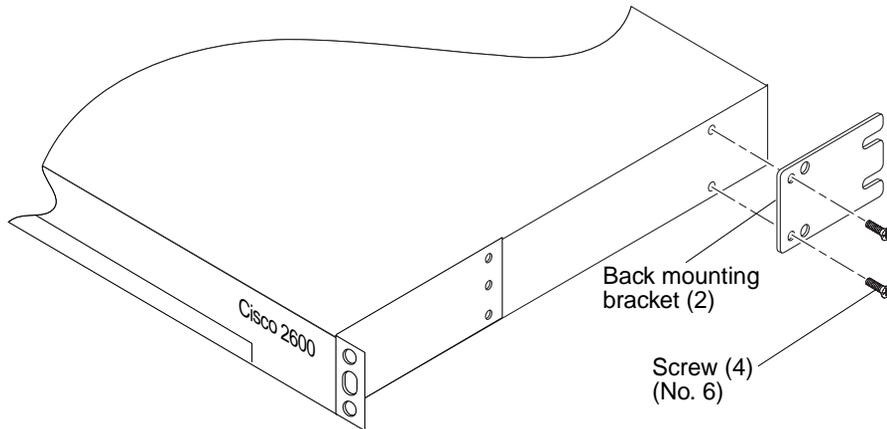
Removing and Replacing the Access Server Rear Bracket
